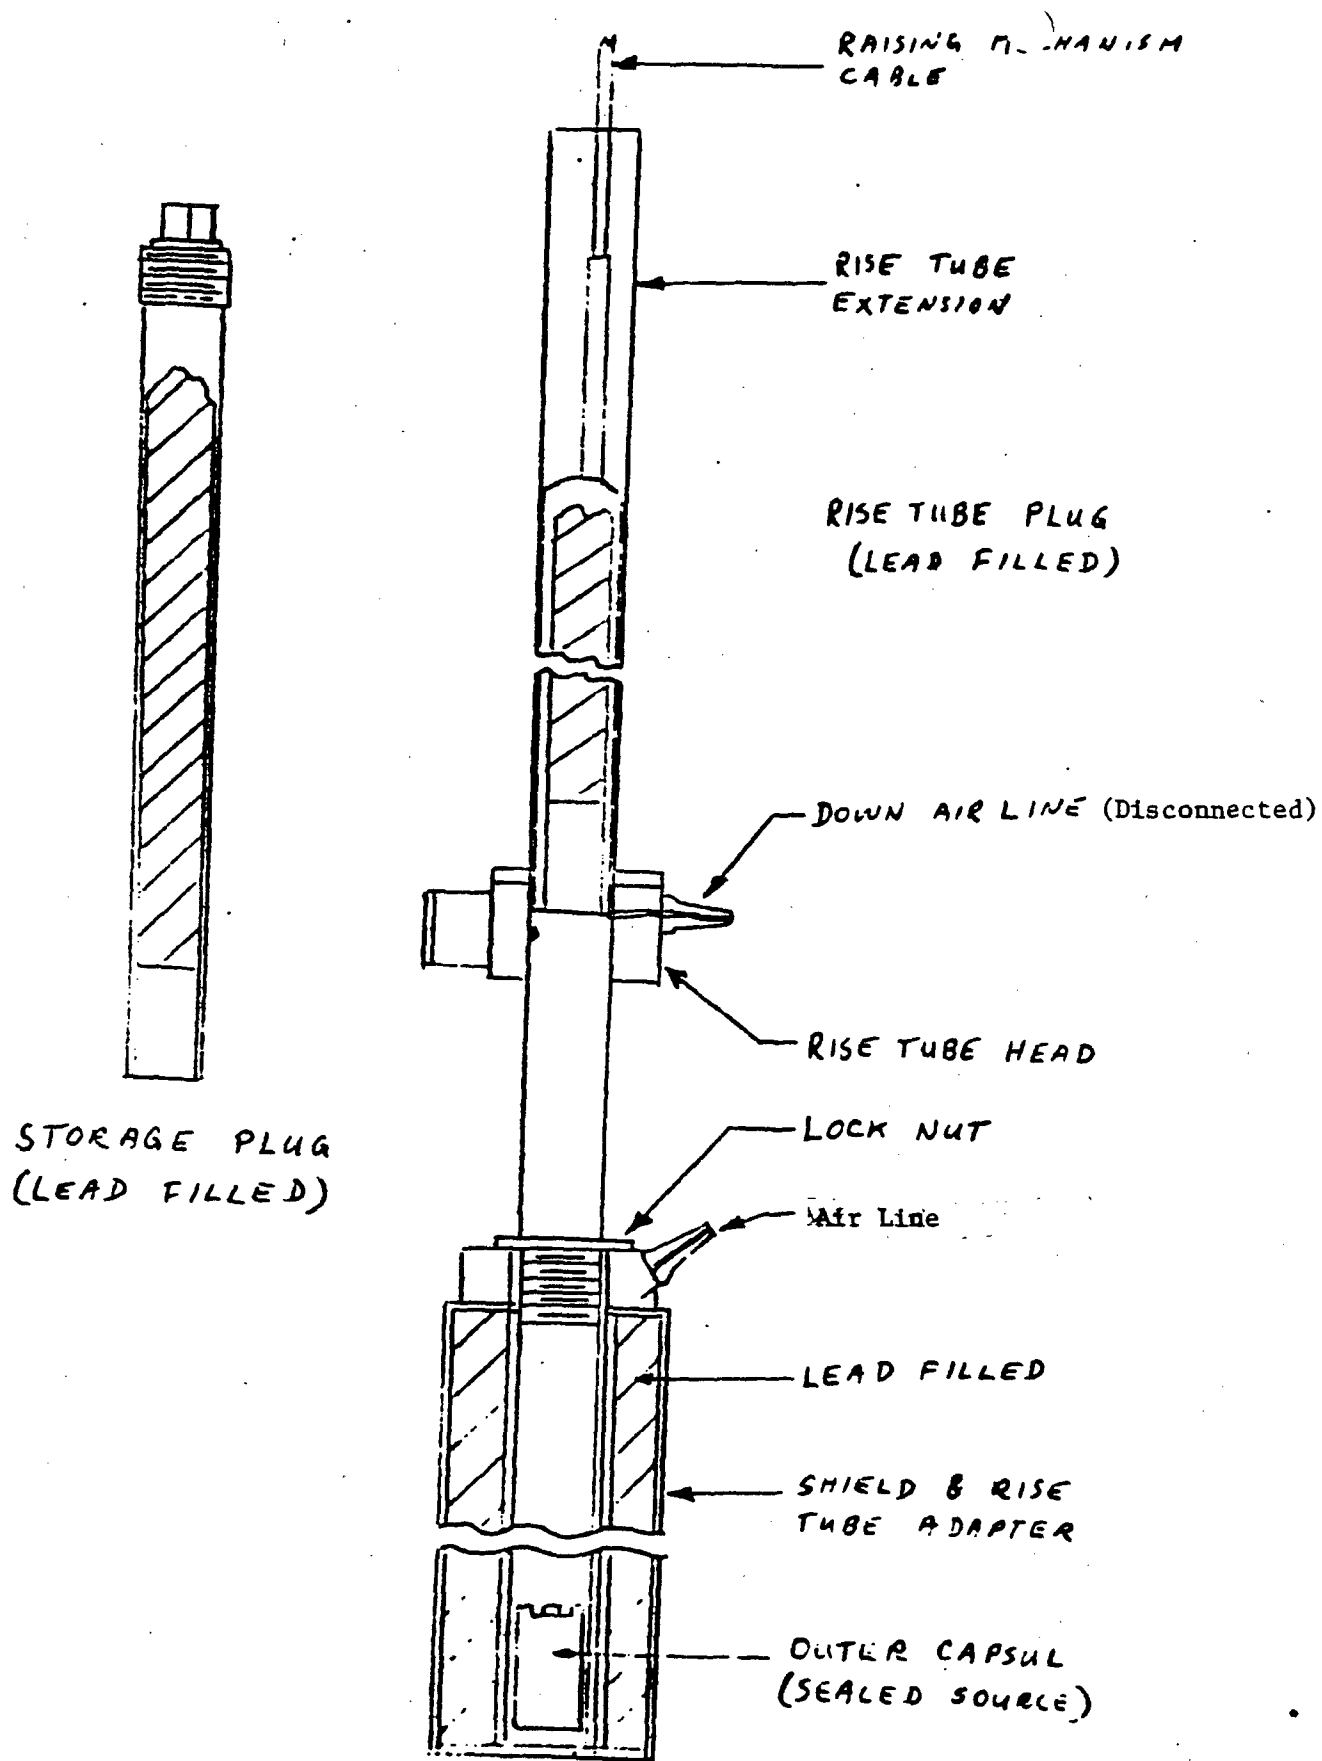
CAPSULE & RISE TUBE ASSEMBLY
